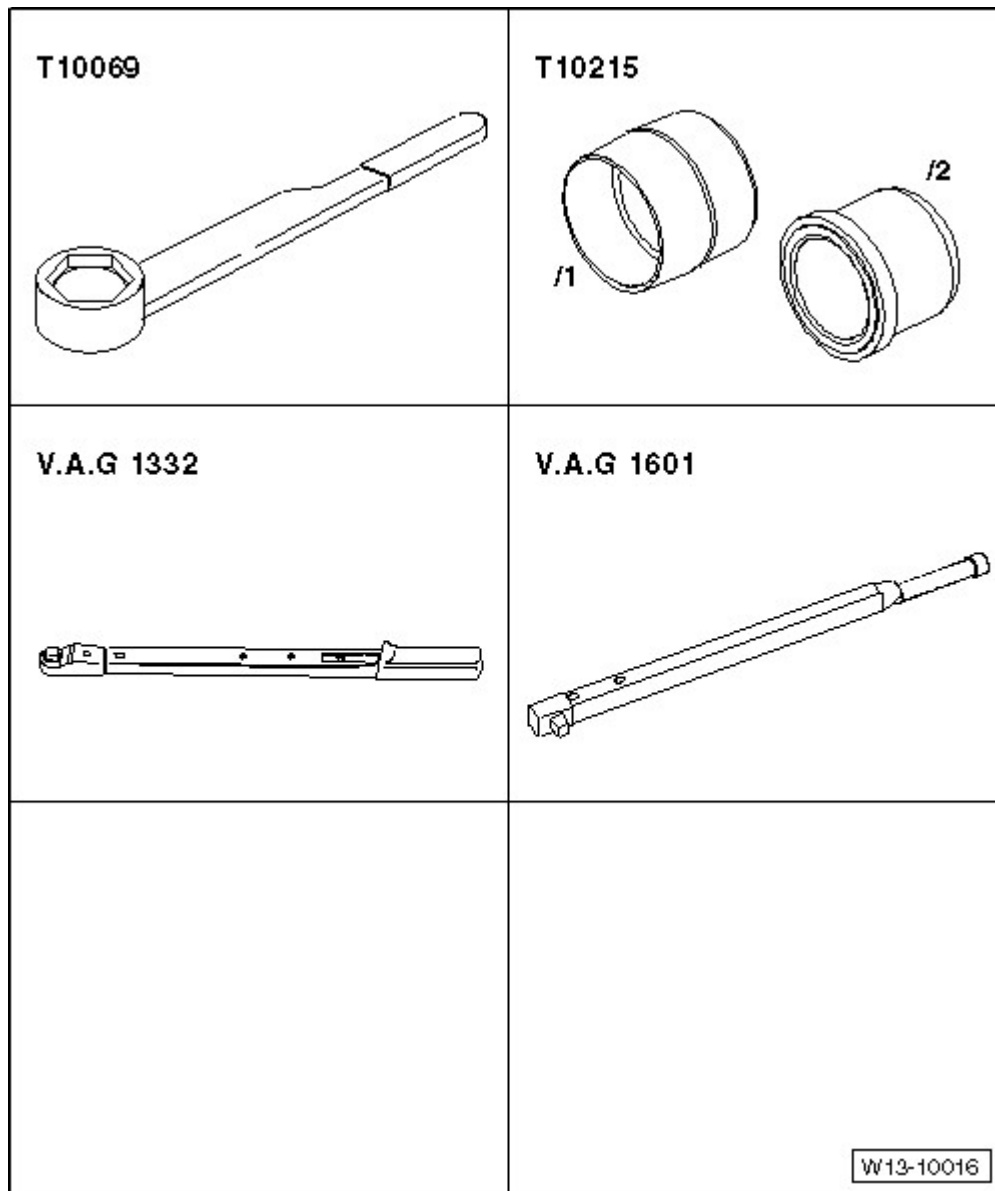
Identifying Special Tools - Sealing Flange For Crankshaft (Harmonic Balancer Side), Replacing
